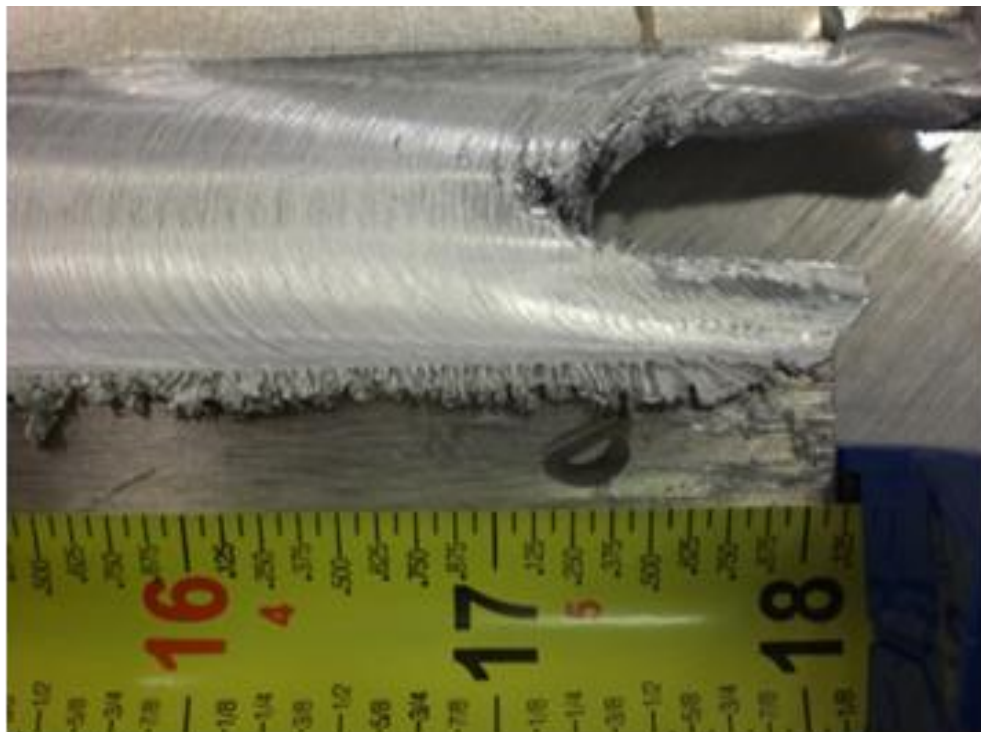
End of the weld for a typical SR-FSW butt joint
